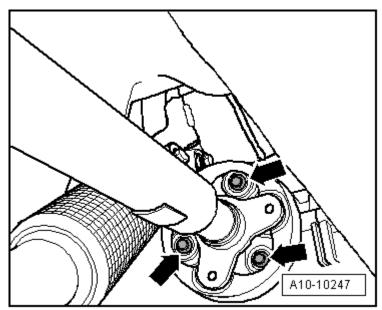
Identifying Flexible Disc Shield Bolts Courtesy of AUDI OF AMERICA, LLC
